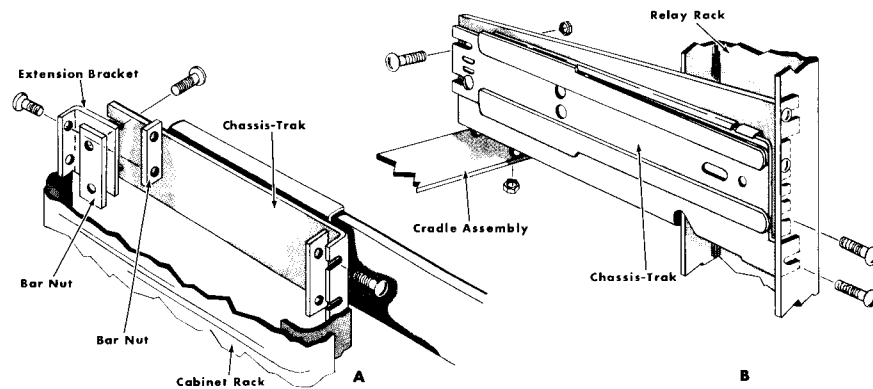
Mounting the Chassis-Trak slides. (A) The Chassis-Trak installed in a cabinet rack. (B) The Chassis-Trak installed in a relay rack.
